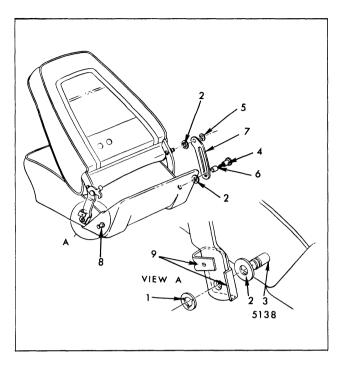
Seat Back Assembly - Standard Bucket Seats
